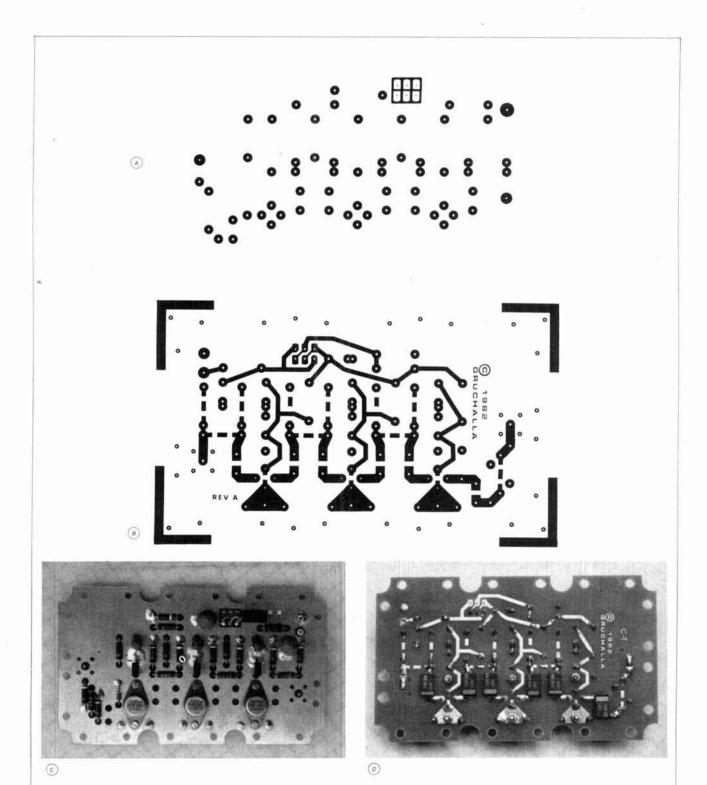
Double-sided PC board: (A) component side artwork, (B) ground plane side artwork, (C) completed assembly — component side view, and (D) completed assembly — ground plane side.
